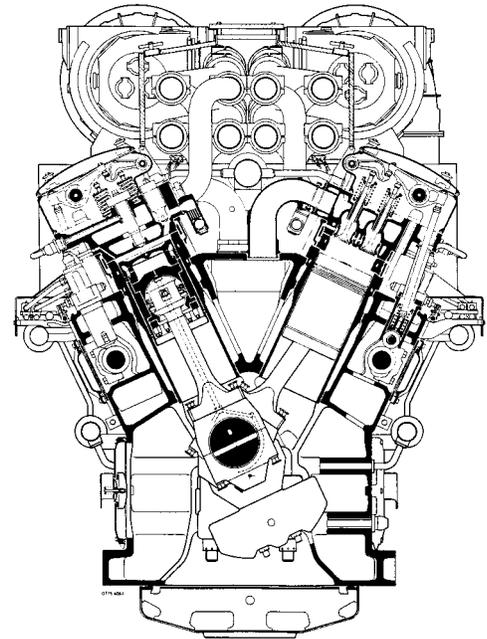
Cross section of Sulzer V-type ZV-40 engine. Bore = 400 mm; stroke = 480 mm.
